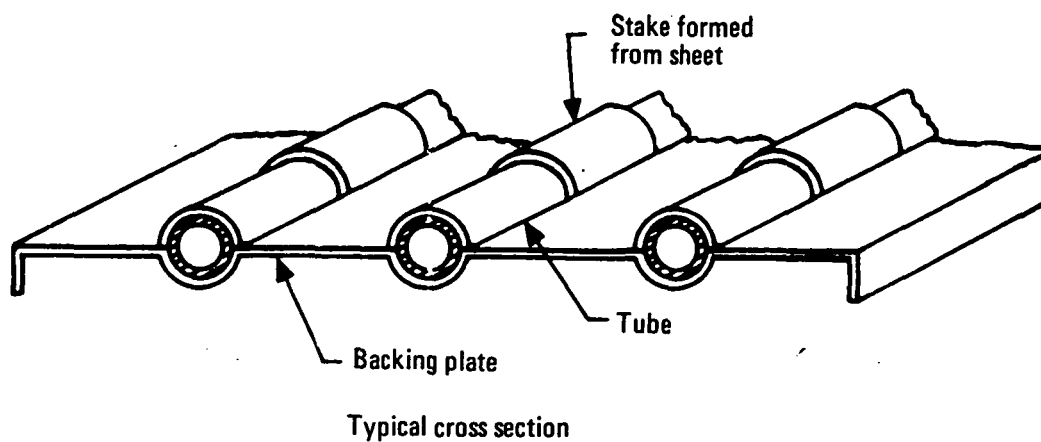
Single Steel Sheet or Aluminum Sheet with Staked Circular Steel or Copper Tubes
